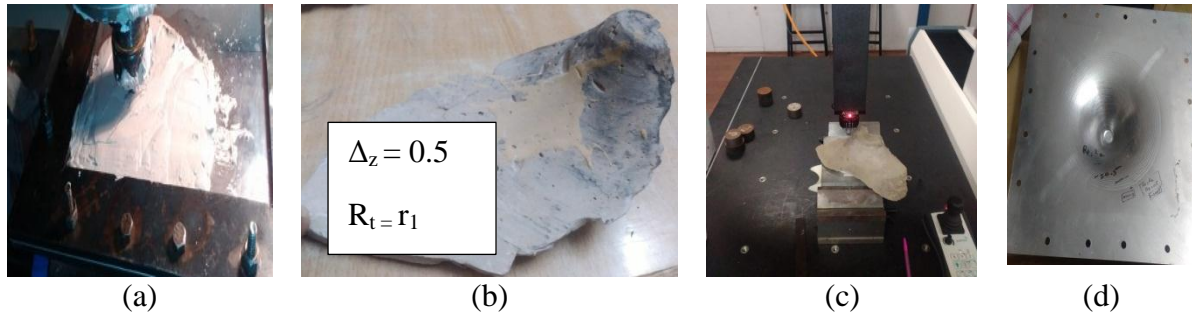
(a) Casting of funnel on POP, (b) casted shape of funnel, (c) CMM measuring of casted shape and (d) funnel in unclamped position
